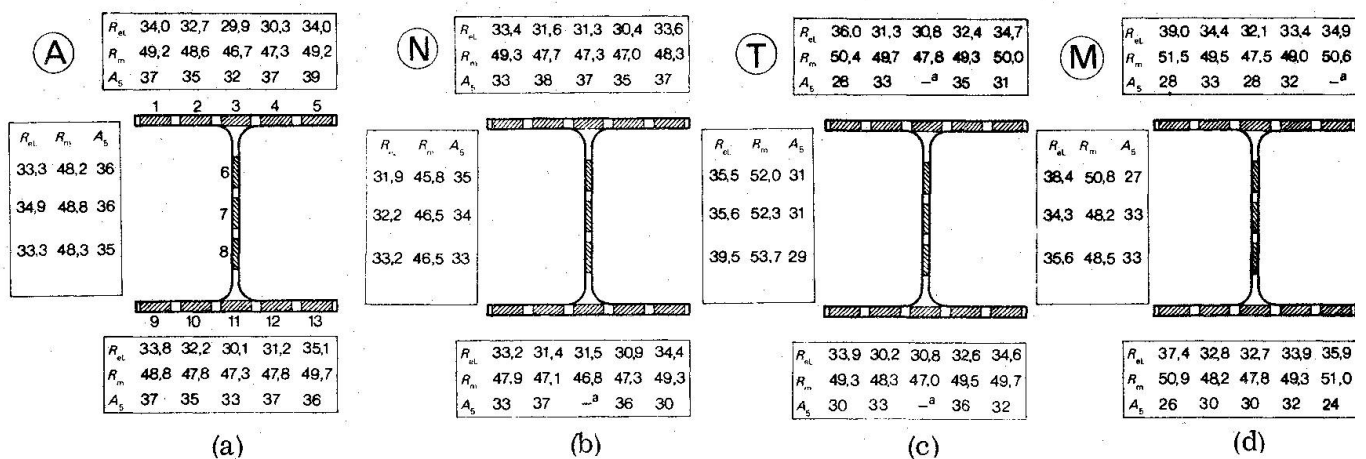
Results of 52 tensile-specimen tests on HE 200 A shapes being (a) as-rolled and subjected to (b) normal rotorizing, (c) twice rotorizing, and (d) modified rotorizing. The symbol "a" denotes fracture outside gage length.
